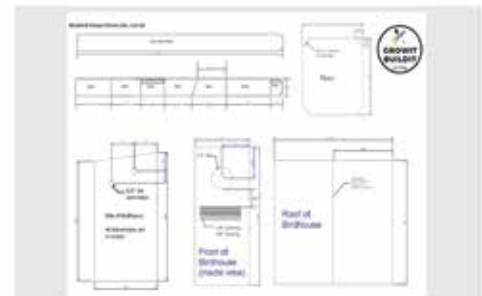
Nest box plans used in the construction of our boxes (Grow It Build It, accessed October 2023).
